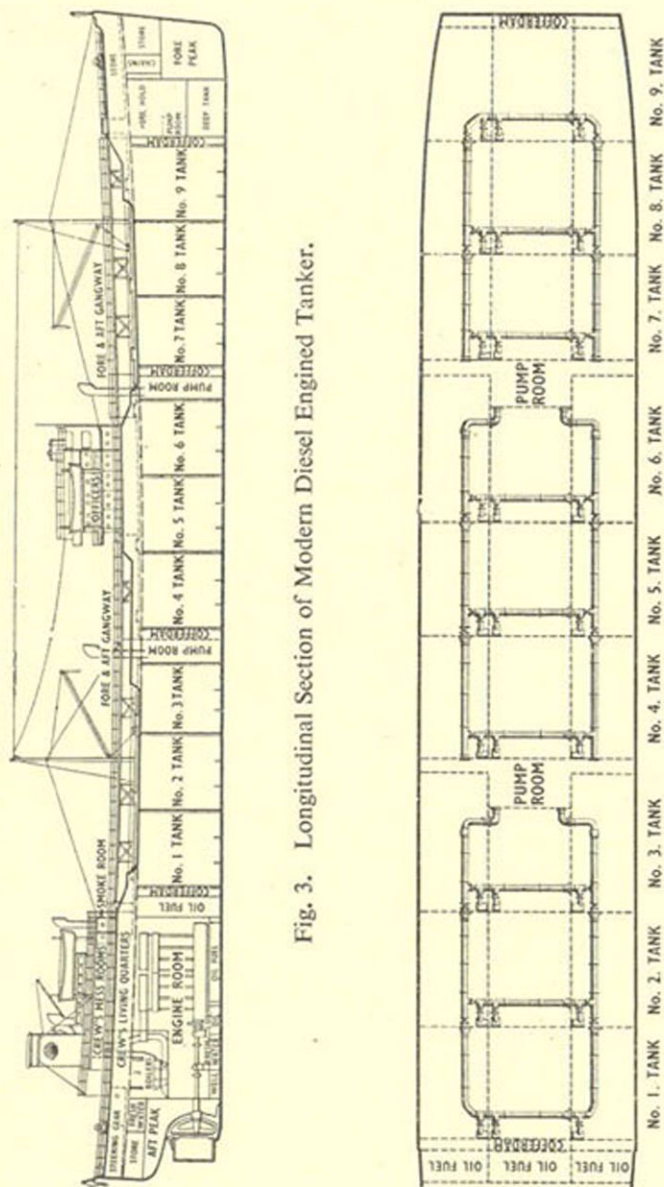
Longitudinal Section of Modern Diesel Engine Tanker.
